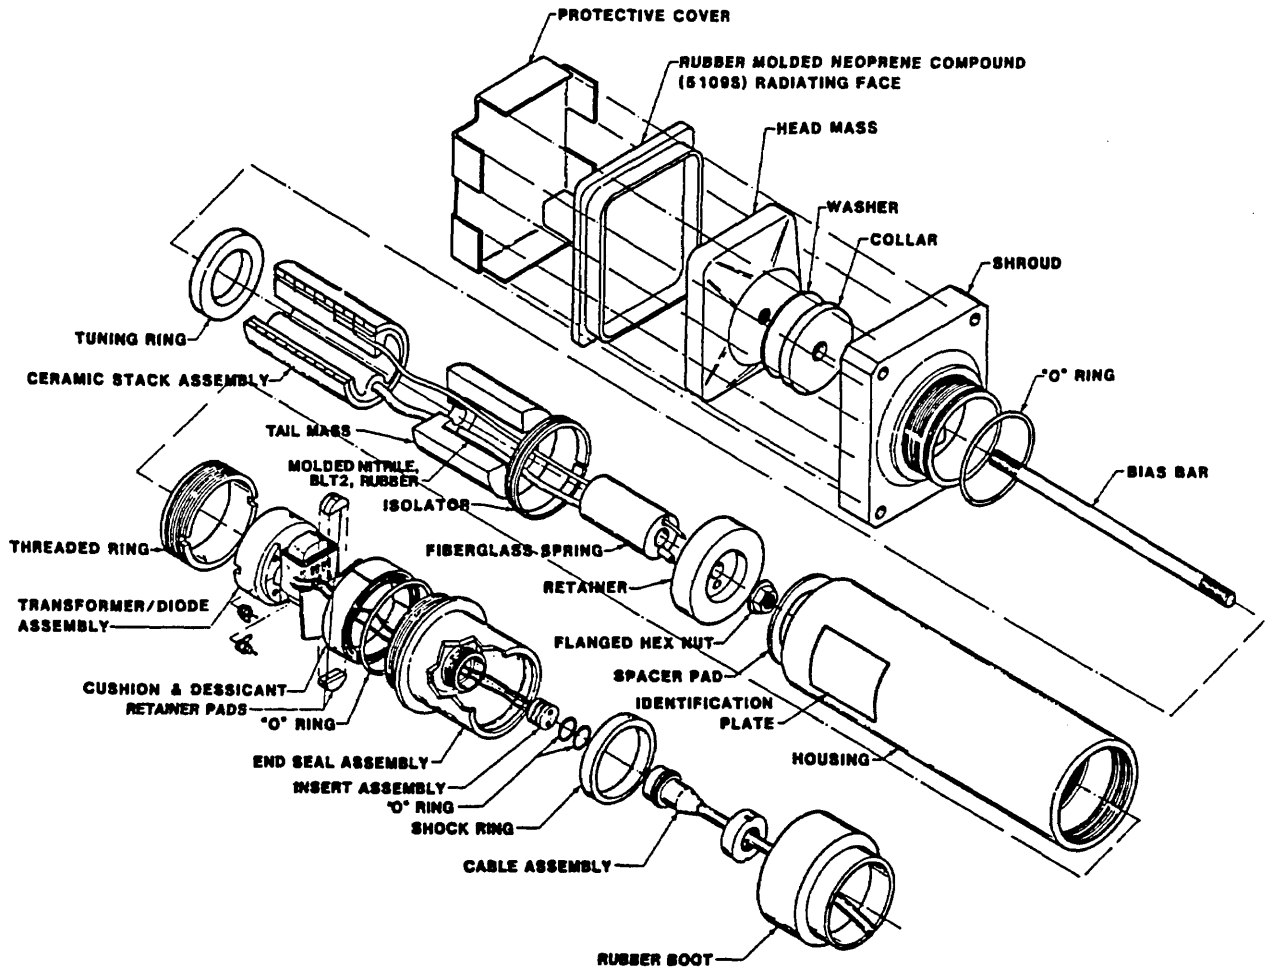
Exploded view of a typical 33-mode fleet transducer
